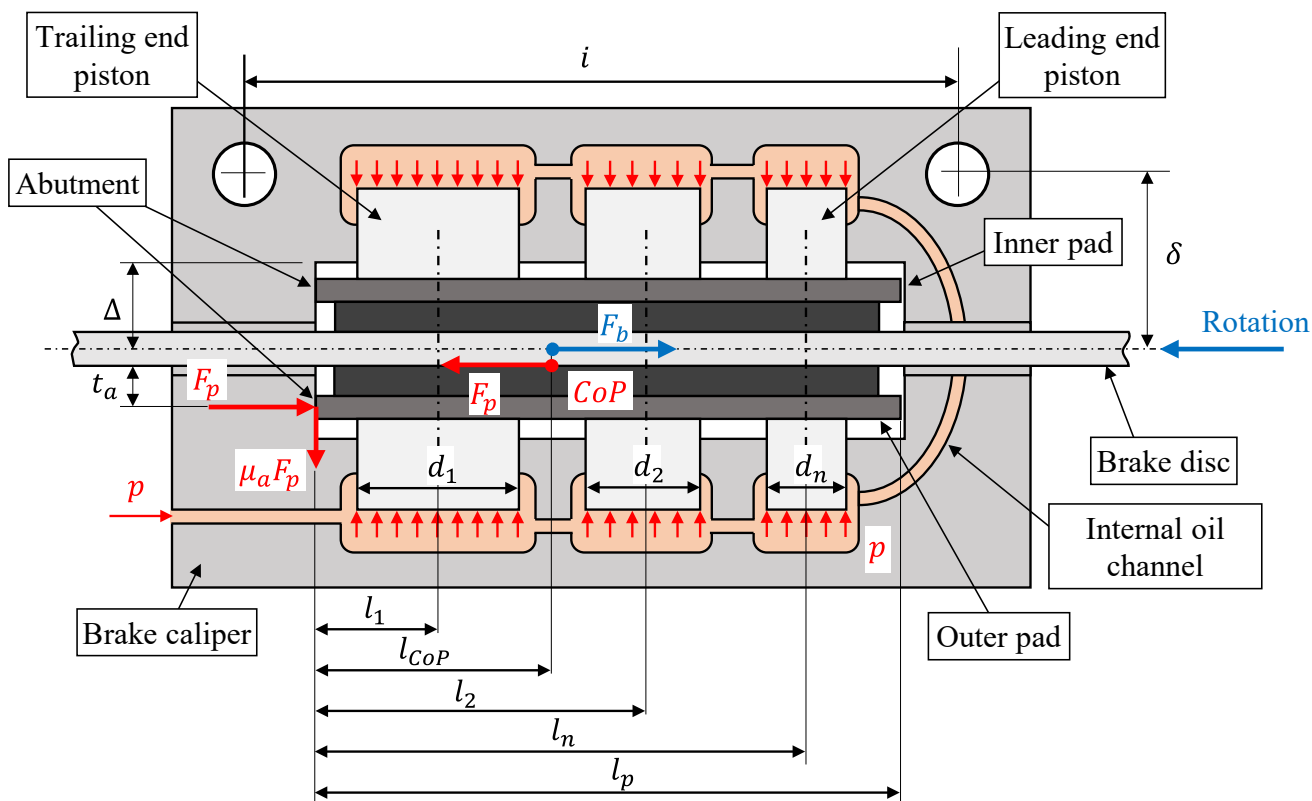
Schematic of a monoblock six-piston fixed caliper.
